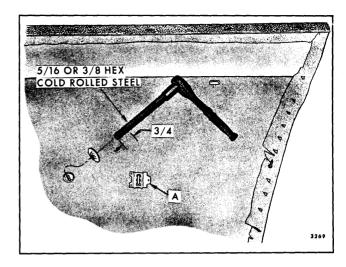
Door Trim Pad Molding and Applique Removal
